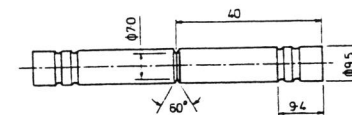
Small circumferentially-cracked cylindrical specimen. All dimensions in mm.
